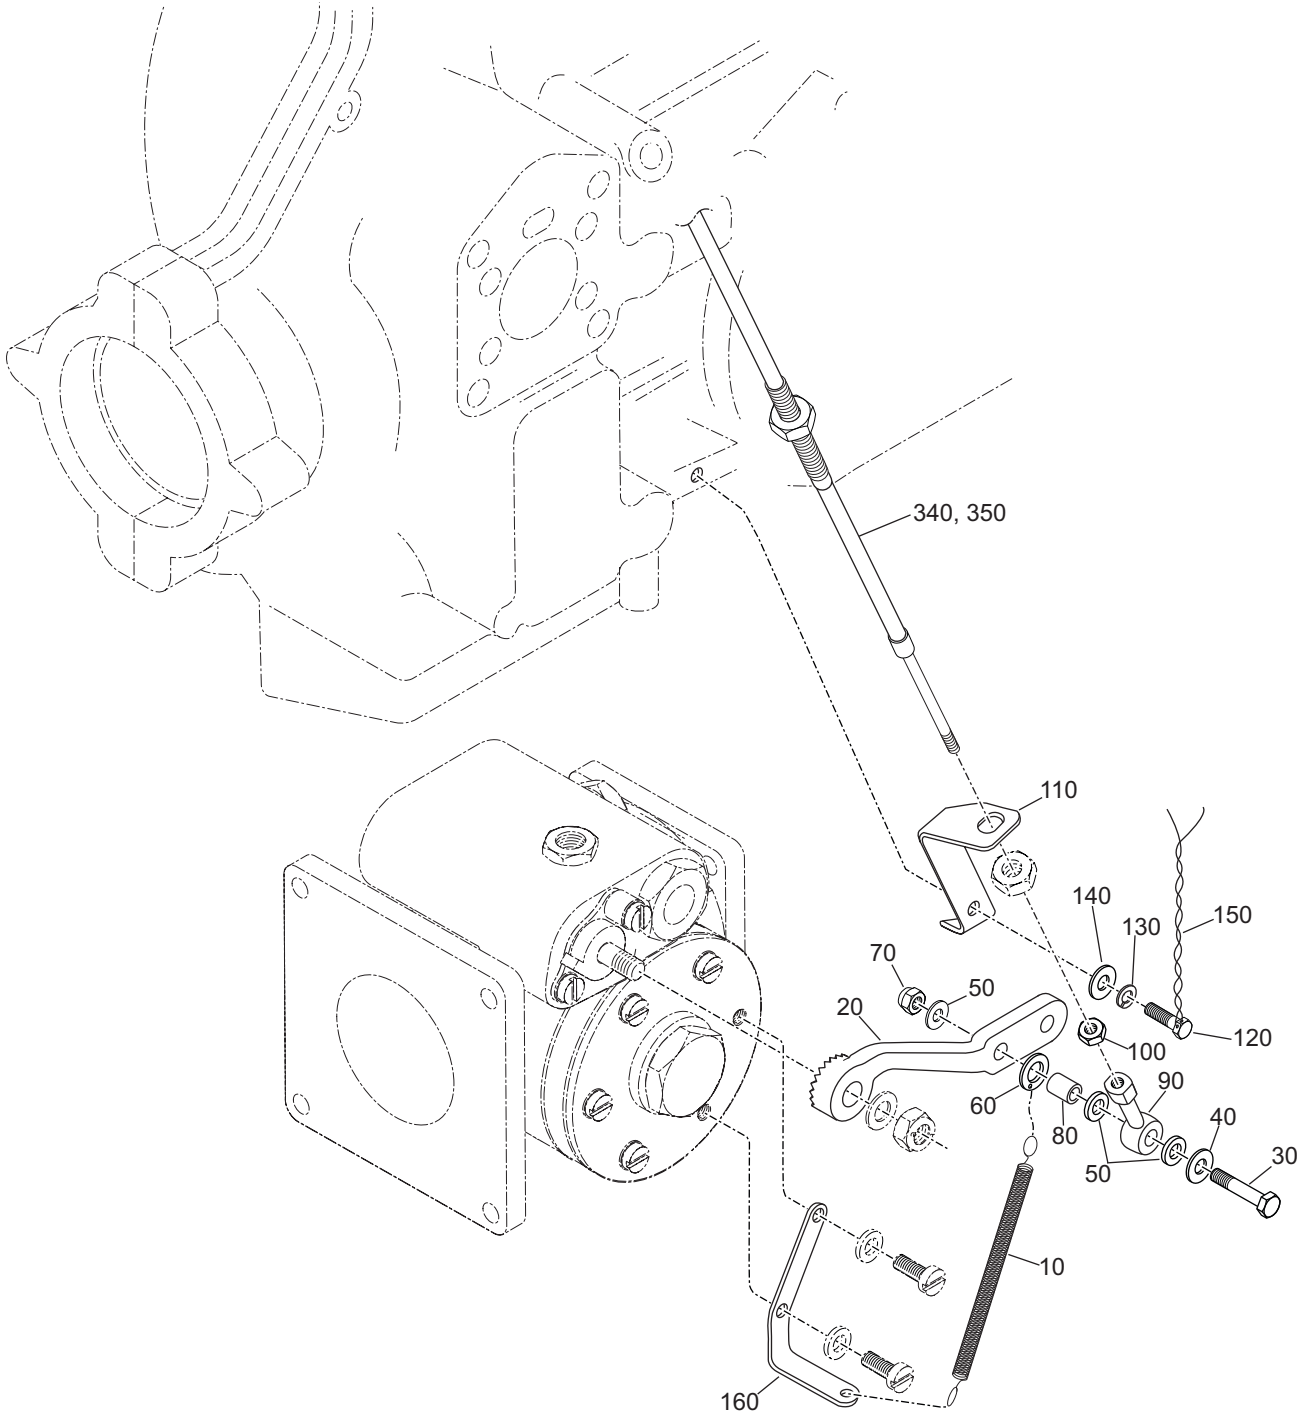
Mixture Control Assembly (Sheet 1 of 4)
